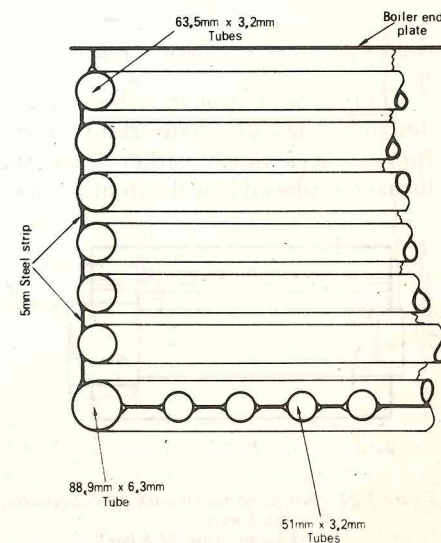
Details of 'Steambloc' water walls showing attachment of steel strip to tubes to form membrane wall
